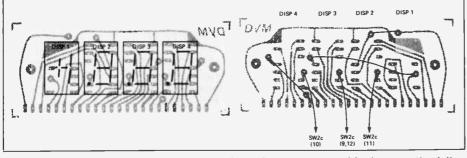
The display board; top, the view from the component side; bottom, the foll side, showing the wire links which must be soldered in place.
